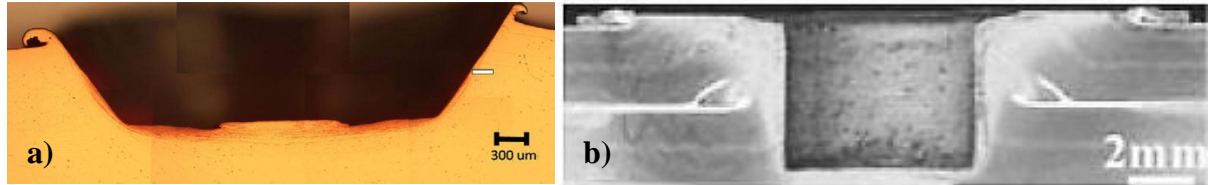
a) Low magnification overview of the pin-plunging detail, of a single crystal austenitic steel welding (Jeon et al. 2011). b) Macrostructure of similar welding of 2024-T3 Al alloy with RS=1200 rpm, PR=8 mm/min, PD=4.6 mm and DT=4 s (Karthikeyan and Balasubramanian 2010).
